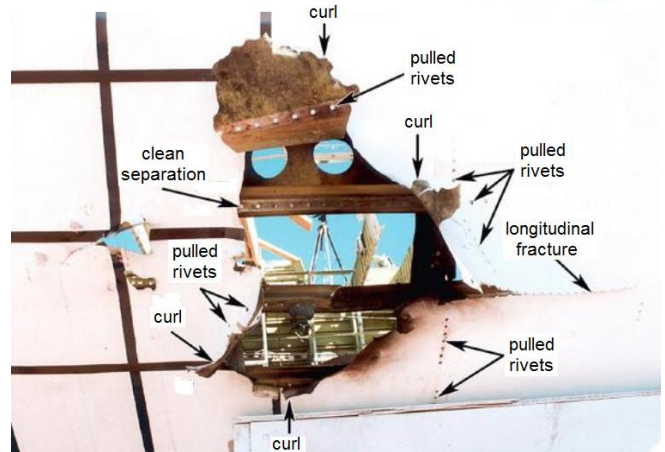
Exterior view of a petaled hole in the fuselage skin of an unpressurized B-747 aircraft following the detonation of IED installed in luggage container. A longitudinal fracture originates from the hole [17].
